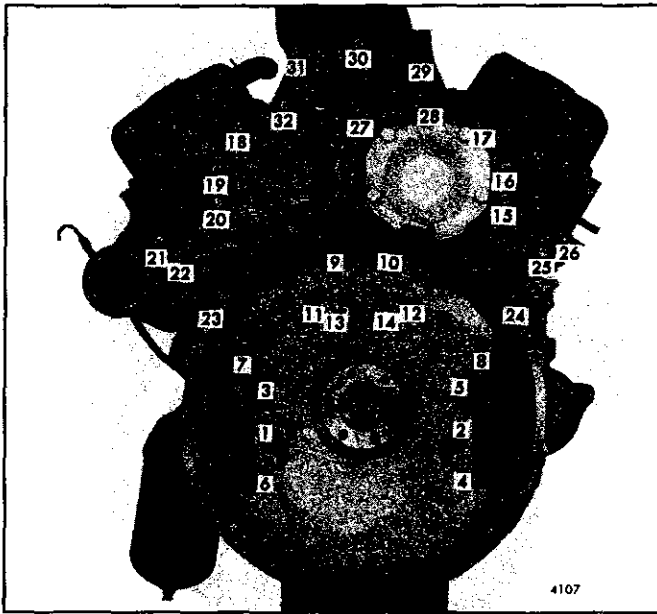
Flywheel Housing Bolt Tightening Sequence
